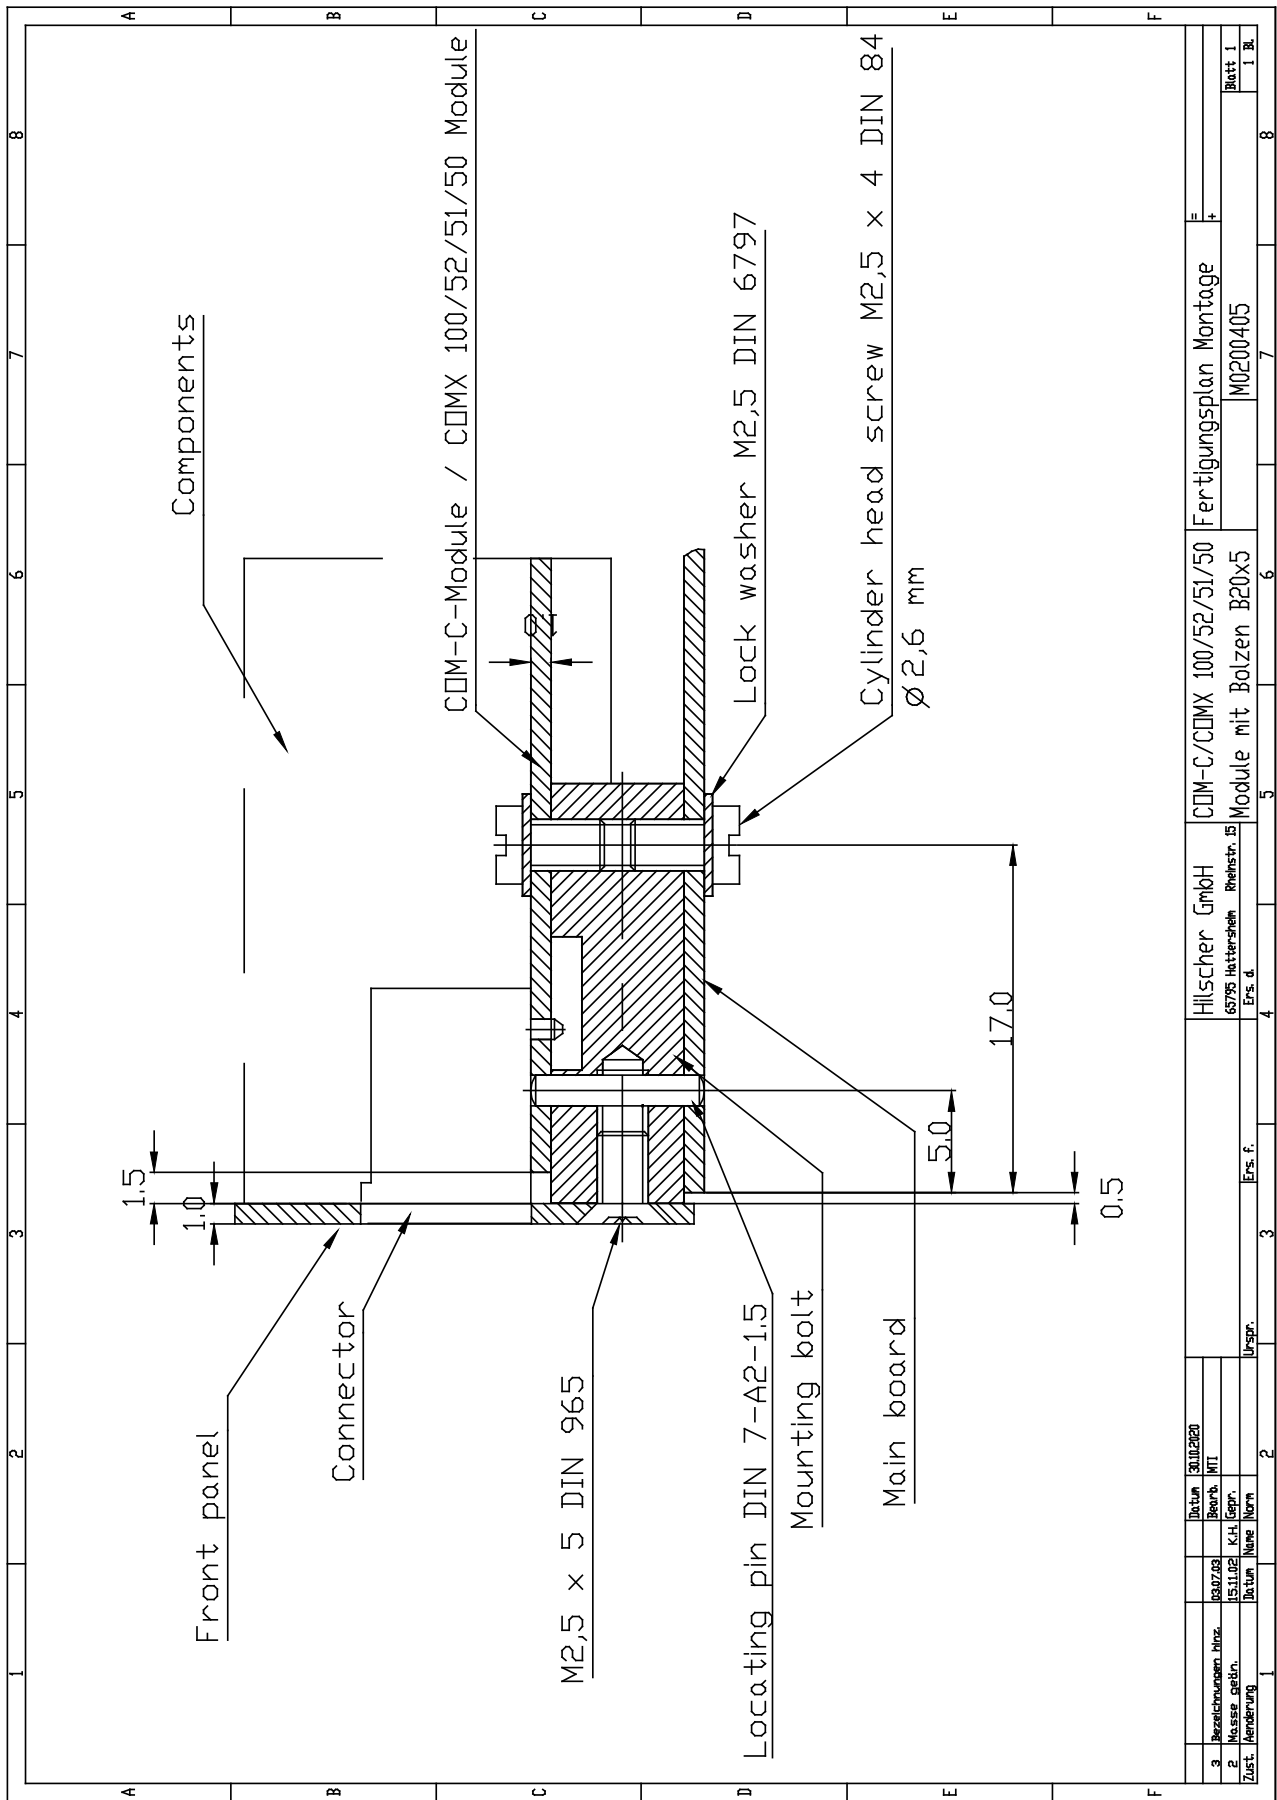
Mechanical dimension of Bolt COM-CA-B24X5
